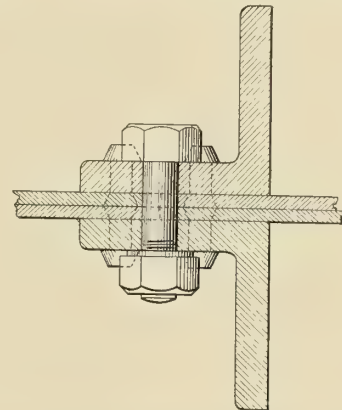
Method of Bolting Bulkhead Stiffeners
